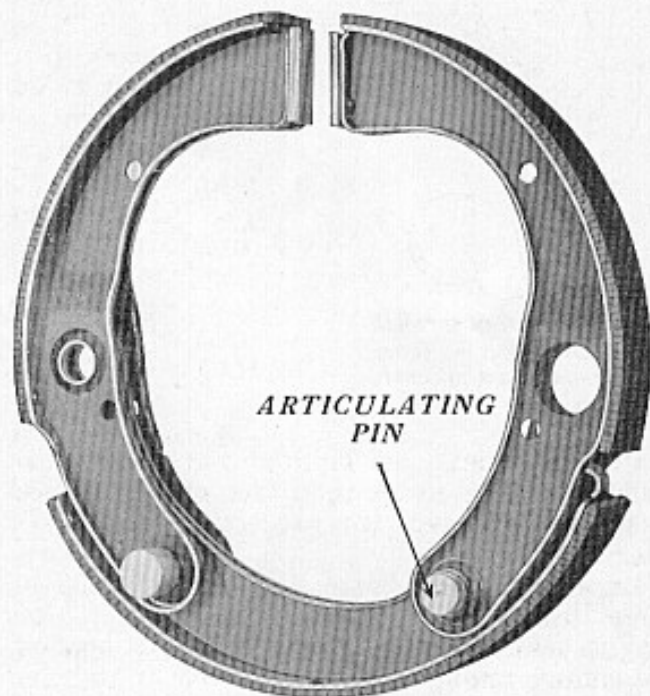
Eleven-inch type Bendix shoe assembly which has only one adjustable anchor pin. Note stub auxiliary shoe pin
